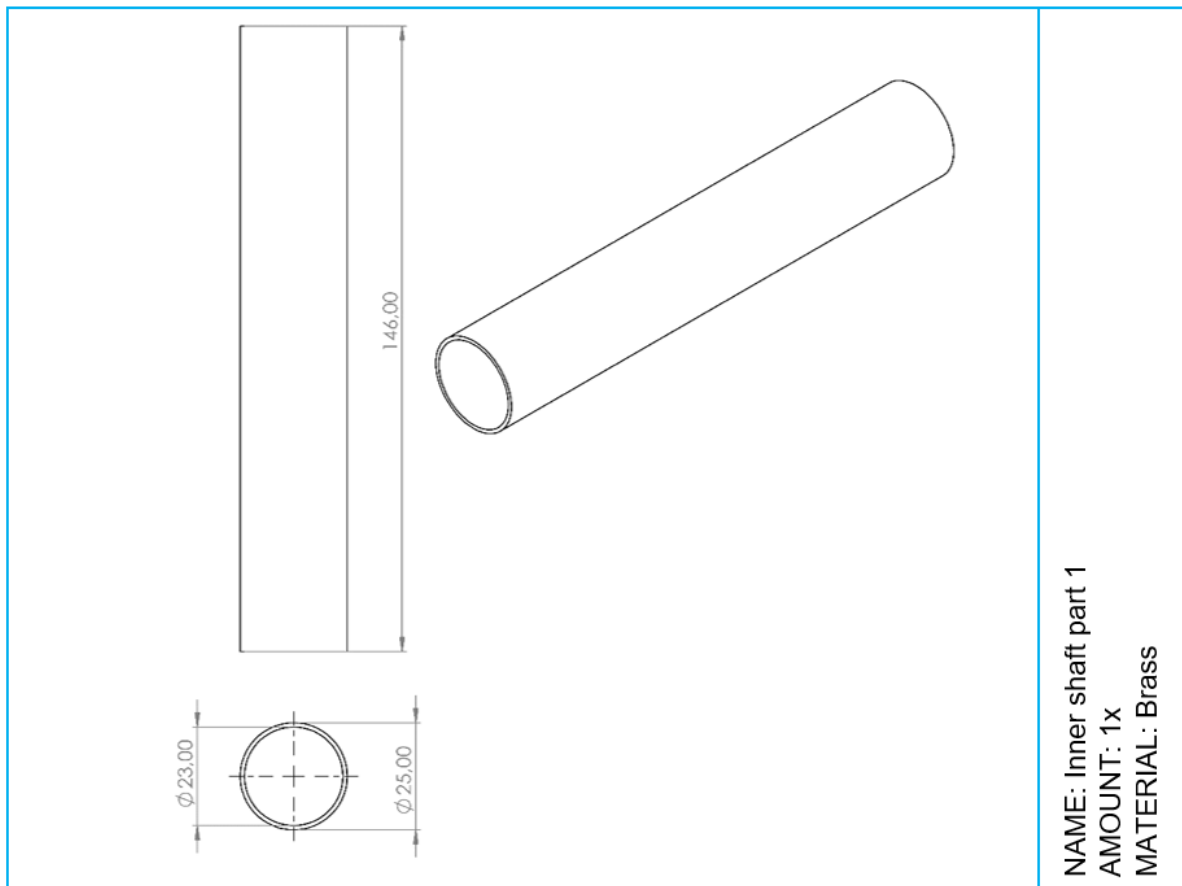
Construction drawings of the inner shaft - Machined prototype
